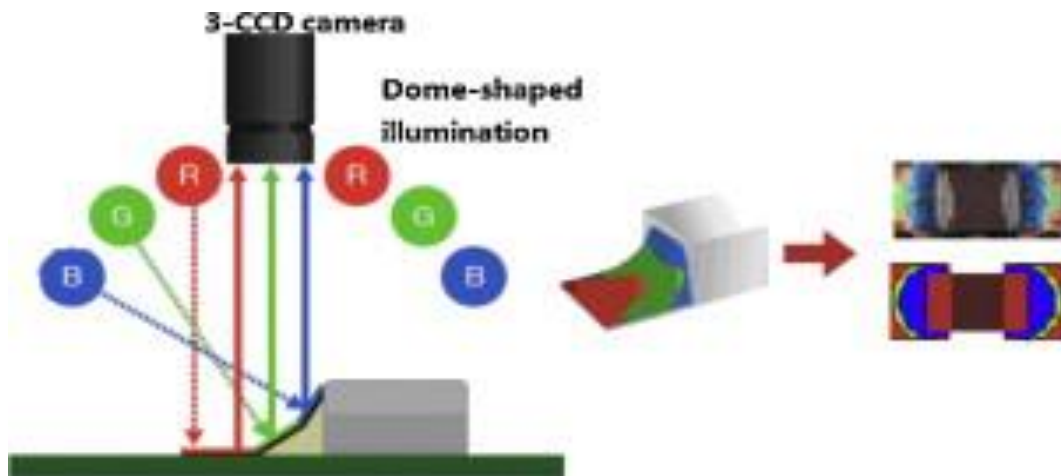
Visual Inspection of the solder joint of surface mount capacitor
